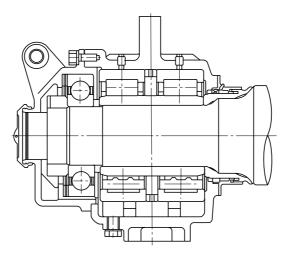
Axle Box with Deep Groove Ball Bearing and Conical Disc Springs to Sustain Axial Load
